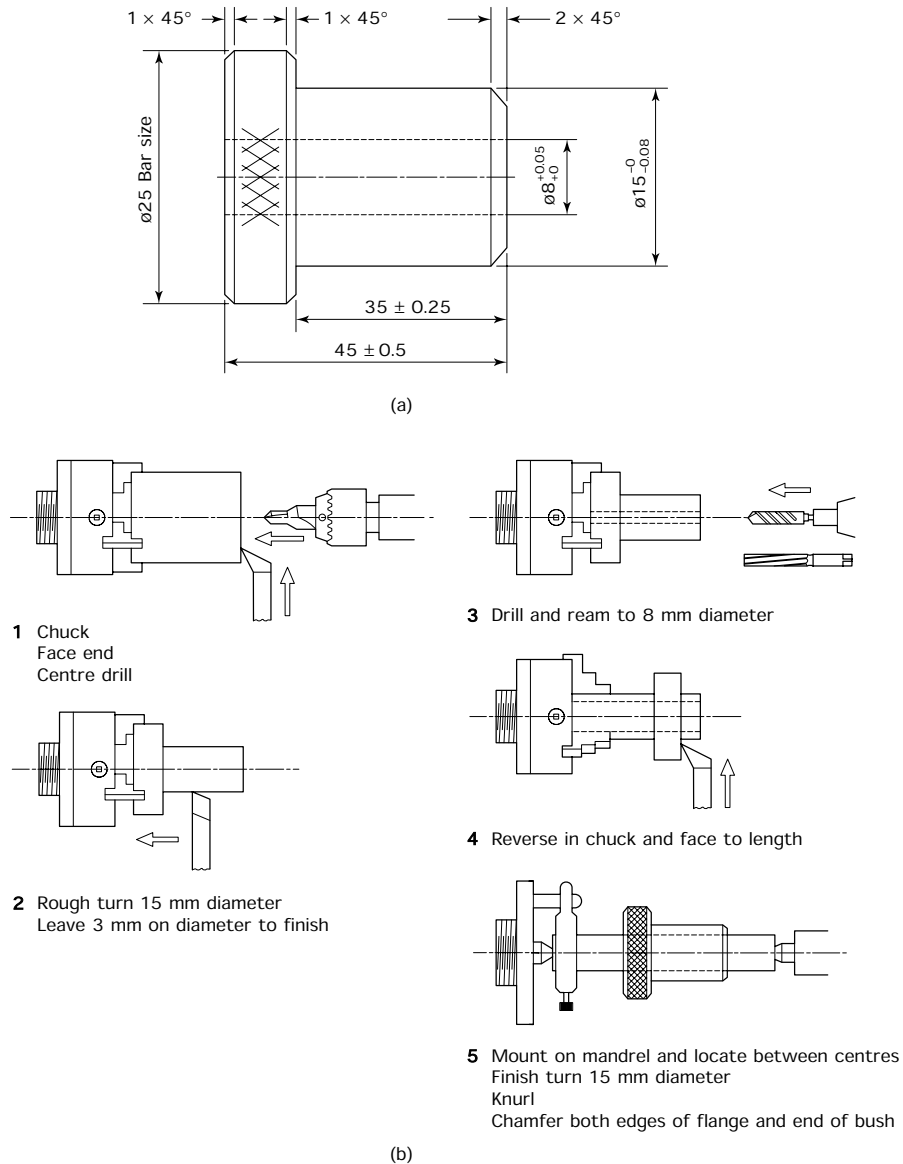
Turning a bush: (a) bush with small diameter bore; (b) turning on a mandrel
